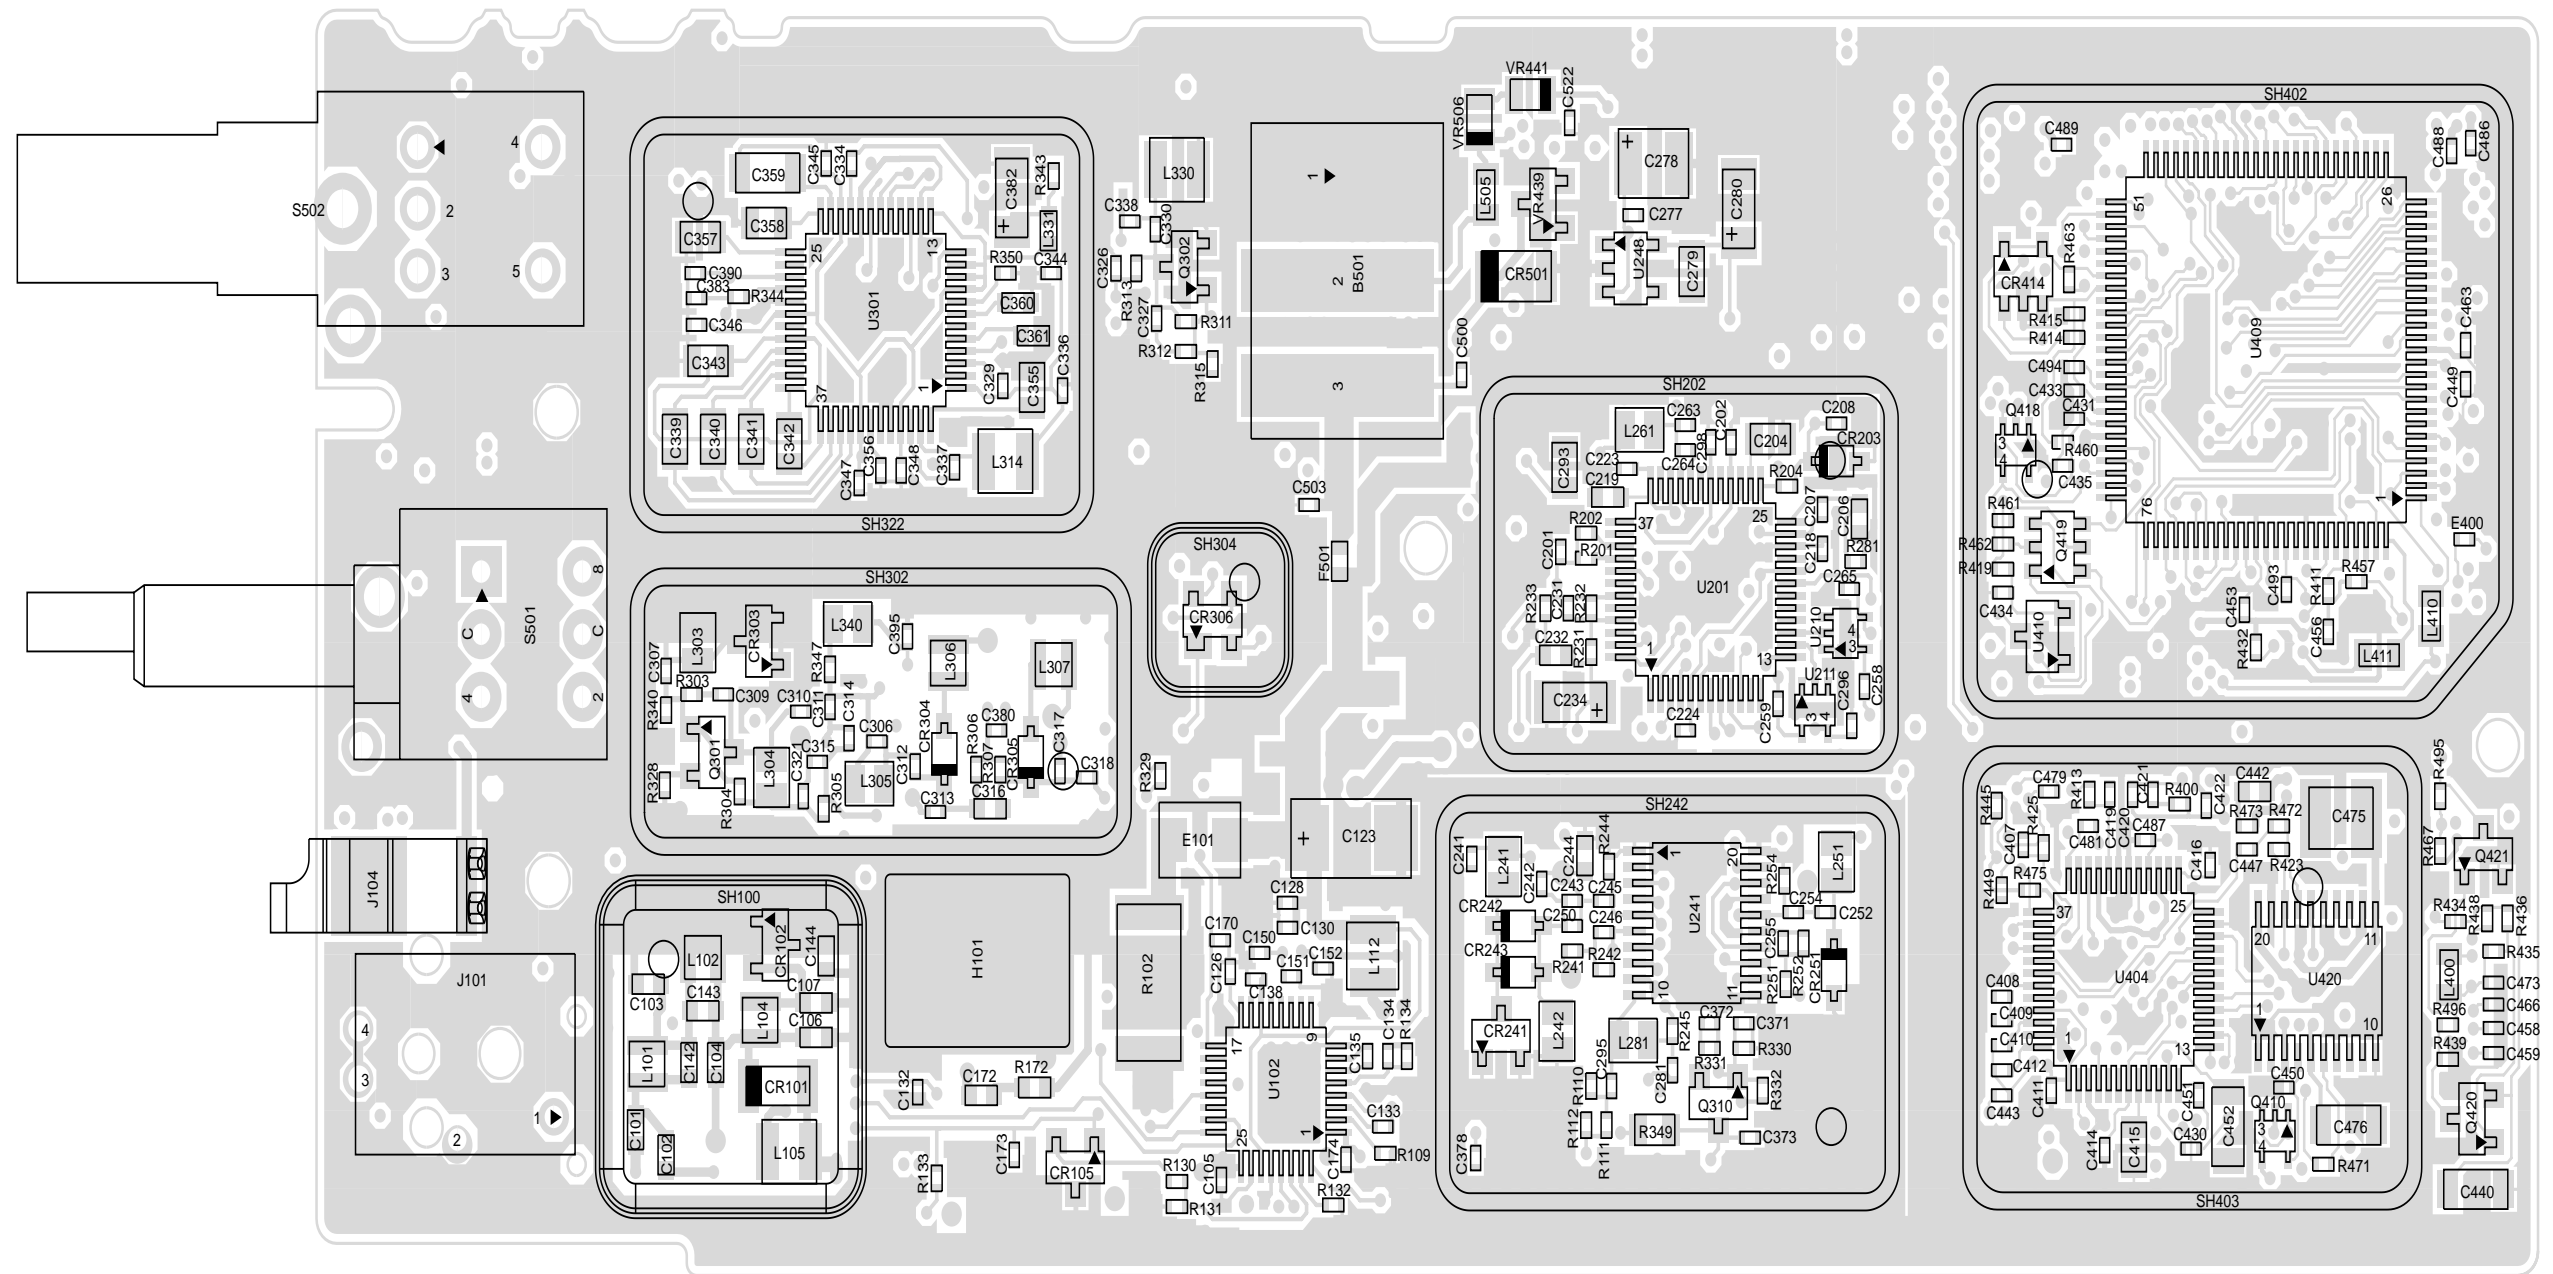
UHF (450-527 MHz) Main Board Bottom Side PCB
